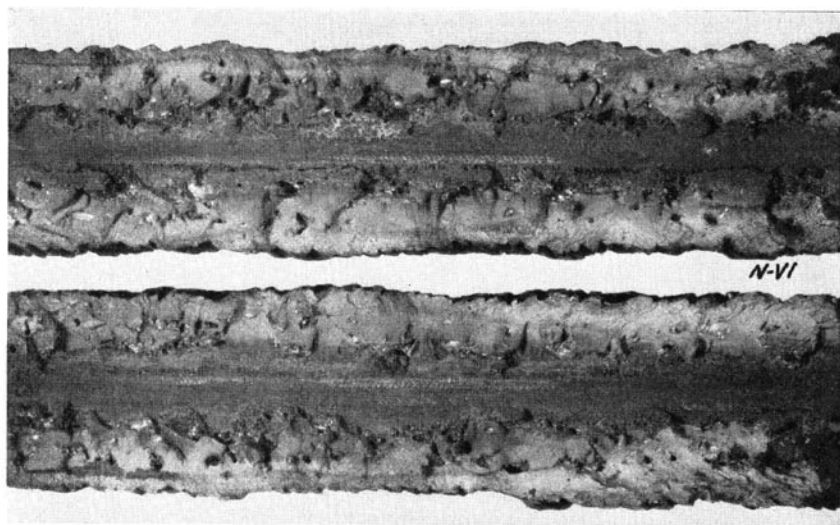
FATIGUE FRACTURE OF SPECIMEN N-VI
